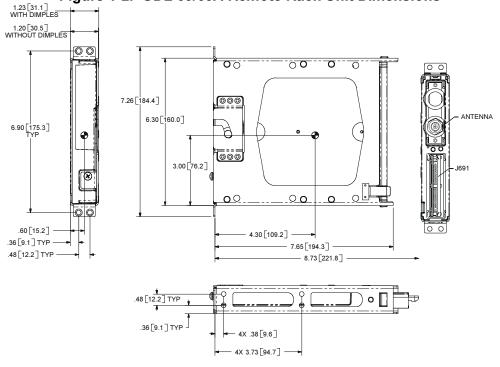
GDL 69/69A Modular Rack Unit Dimensions
